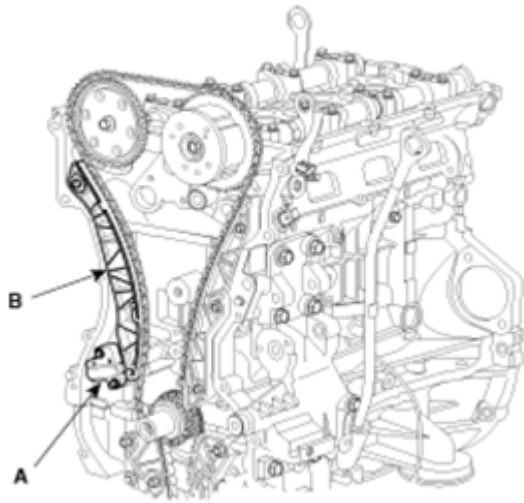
Identifying Timing Chain Tensioner & Tensioner Arm (Single CVVT)
